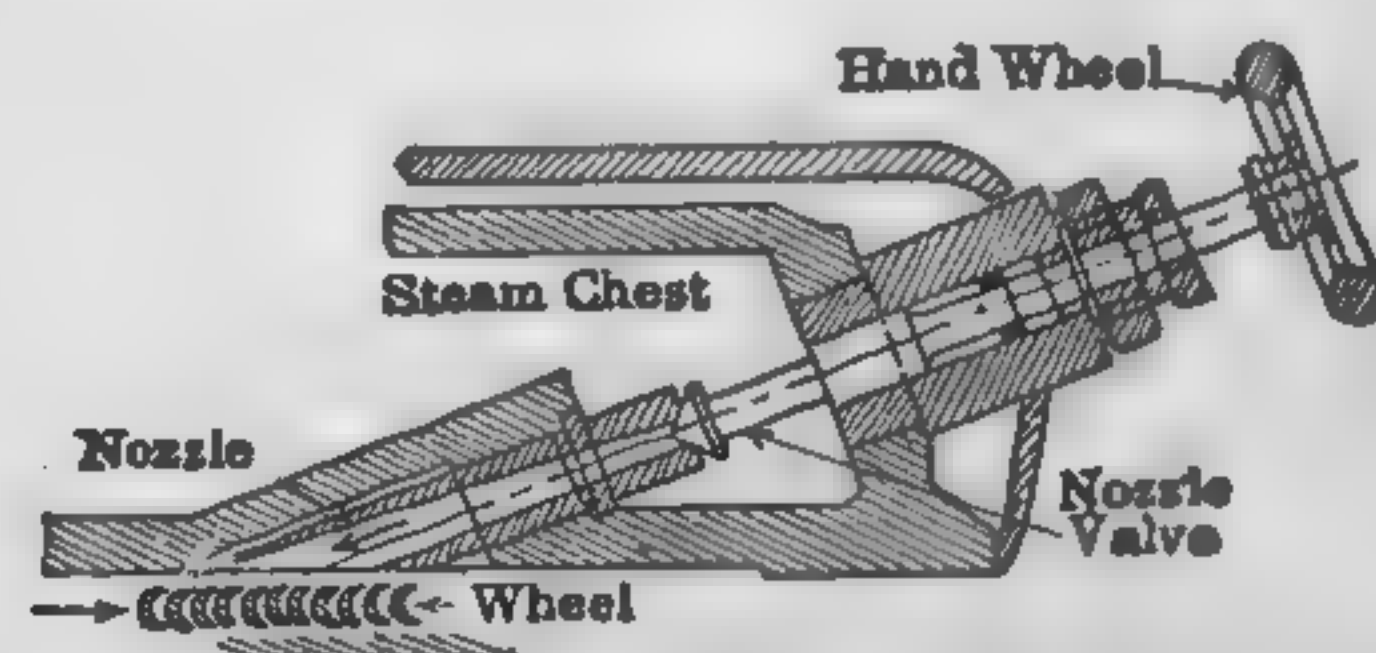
Nozzle Arrangement, De Laval "Class A" Turbine.
